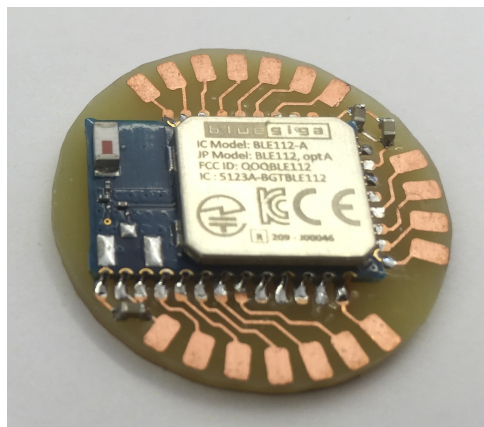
A low energy Bluetooth module with compact measurements is soldered onto a PCB.
